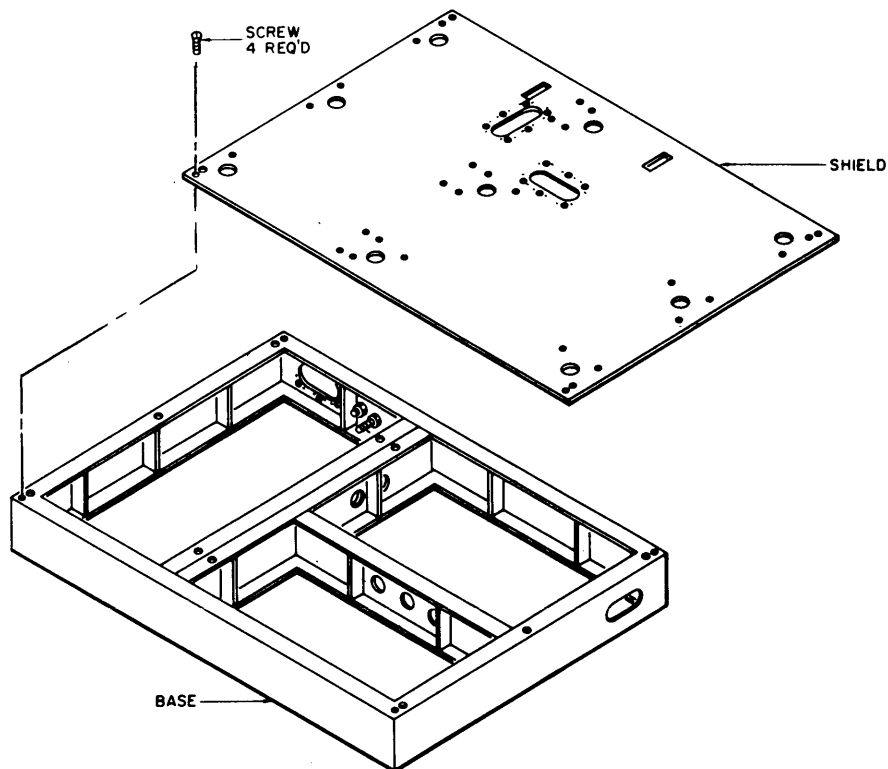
Base Assembly, First and Second Frames, Installation Diagram
